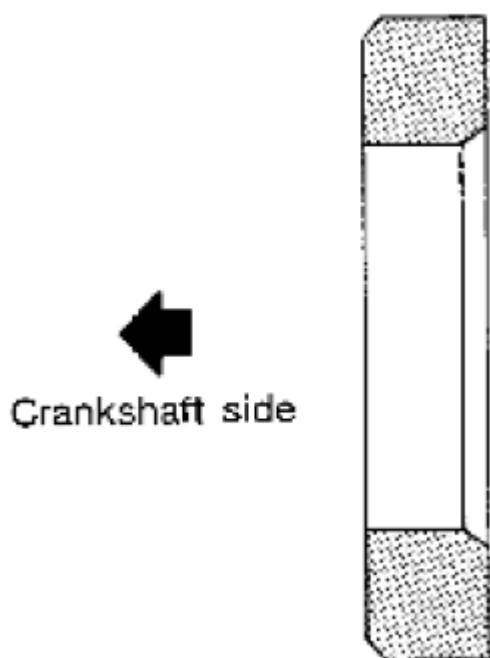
Pressing Pilot Converter With Chamfer Facing Crankshaft
